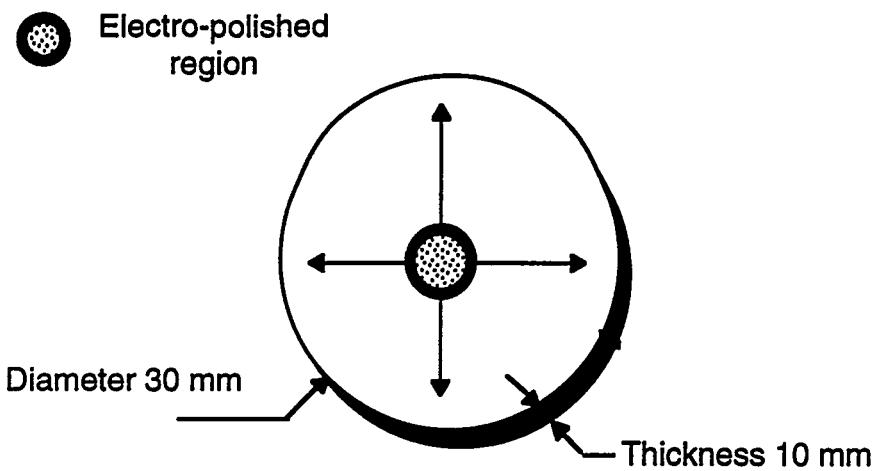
Schematic drawing of the Carburized Puck showing the measurement location and directions.
